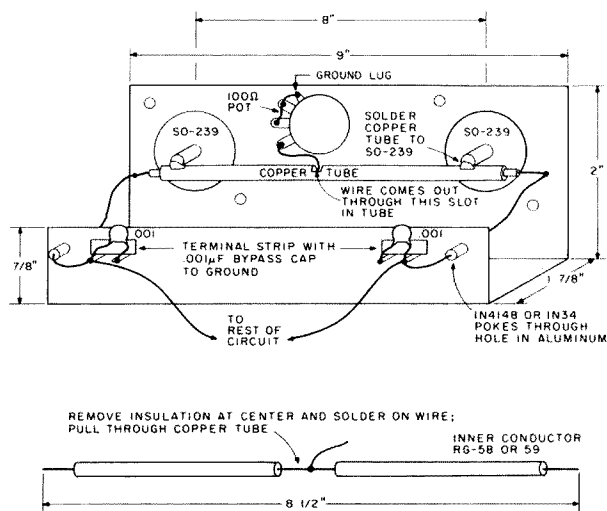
Sheet metal layout and pickup element plans for the Varimatcher swr bridge.
